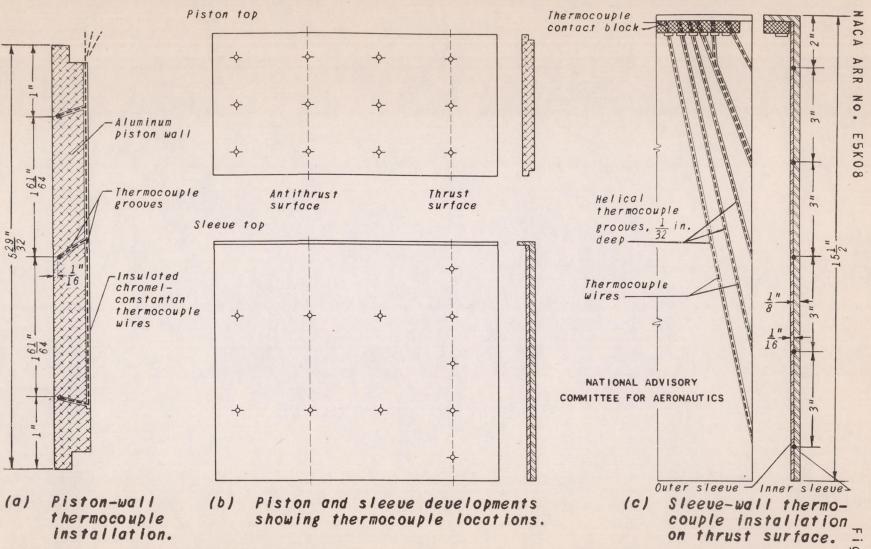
Locations and installation details of piston and reciprocating-sleeve thermocouples.
